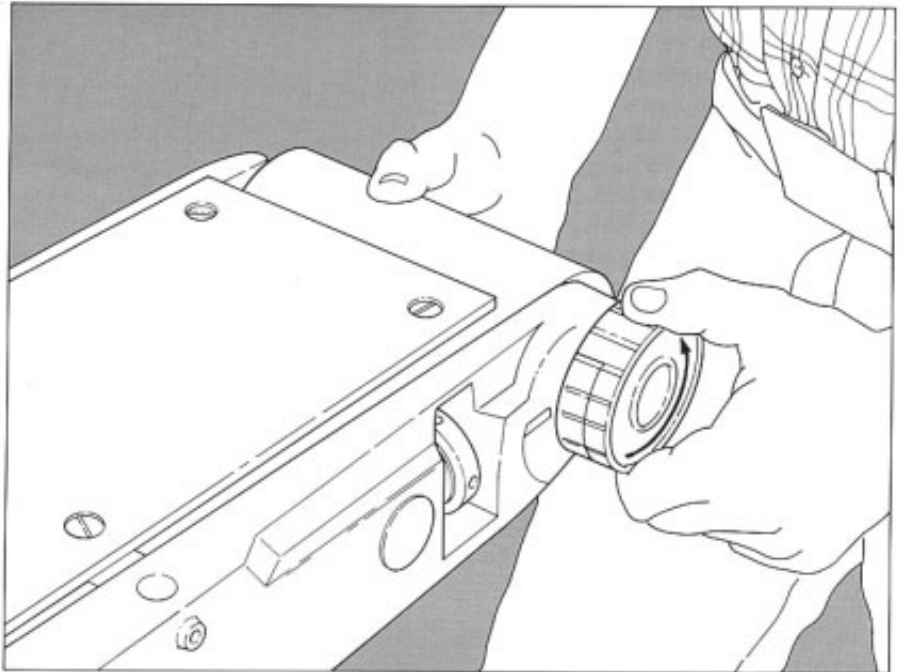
To re-tension the idler drum, first release all remaining tension. Then turn the tension knob four full revolutions counterclockwise. The catch in the knob will prevent the torsion spring from unwinding.
